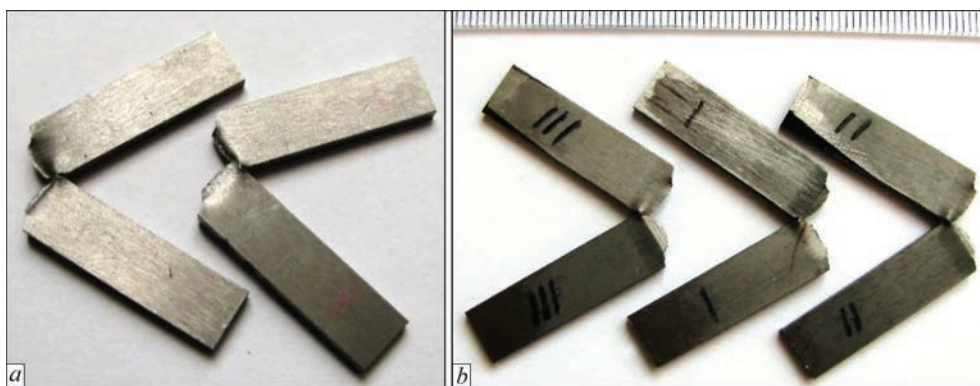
Appearance of fractured specimens: *a* — base metal; *b* — welded joint
